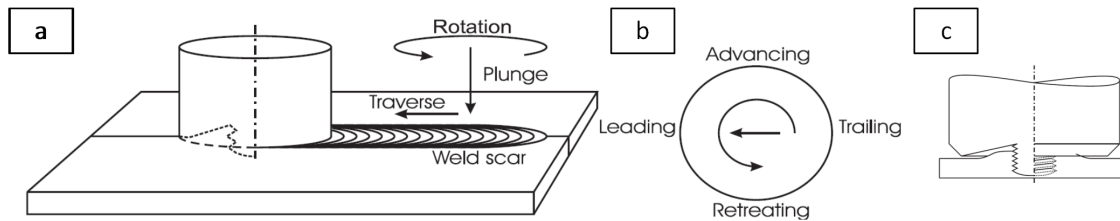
(a) Schematic of the weld set-up and definition of orientations, (b) top view, and (c) side view [41].
